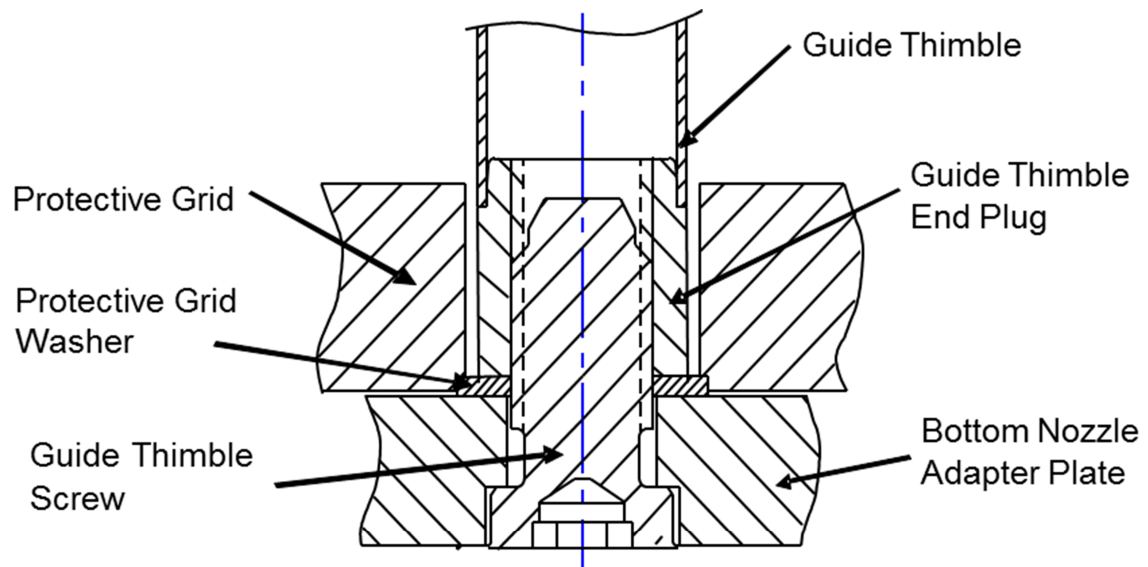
Guide Thimble to Bottom Nozzle Joint
